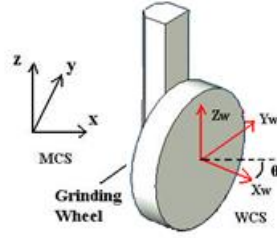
The grinding wheel show the rotation angle θ that is fixed during a grinding cycle.
